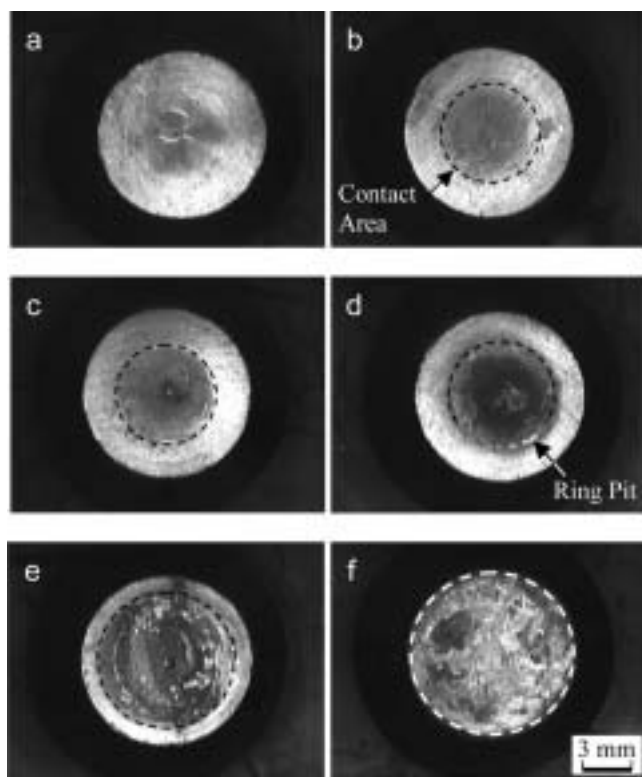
Electrode surfaces after (a) 20, (b) 50, (c) 100, (d) 200, (e) 500, and (f) 2000 welds. The contact area is shown in dashed lines.
